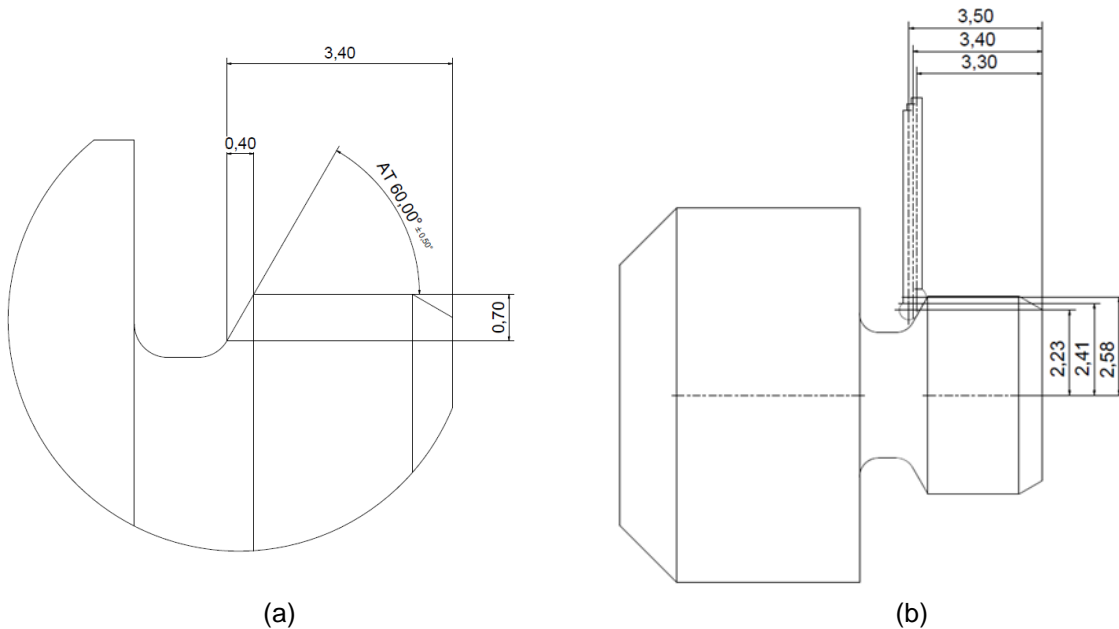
a) Super-exposed sectional view of the TEC, showing the position and values of angle AT. b) Side view drawing of the TEC showing X-axis positions of the CMM probe used to measure and calculate with the corresponding Y-axis positions, the angle AT.
